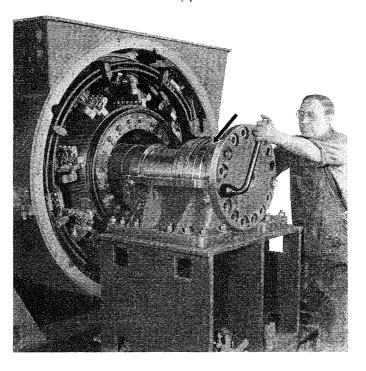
Six-shoe bearing at forward end of 3900 h.p. propulsion motor. Courtesy Ailis-Chalmers Mfg. Co.
